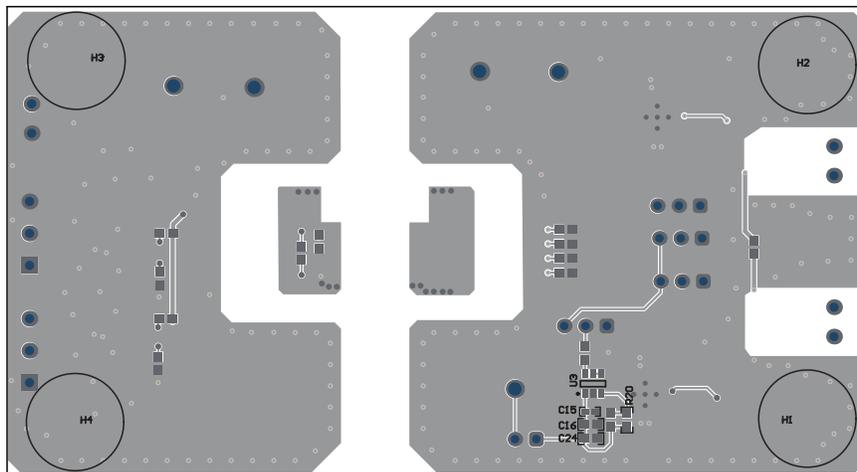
ISOW3080DWEEVM PCB Layout - Bottom
